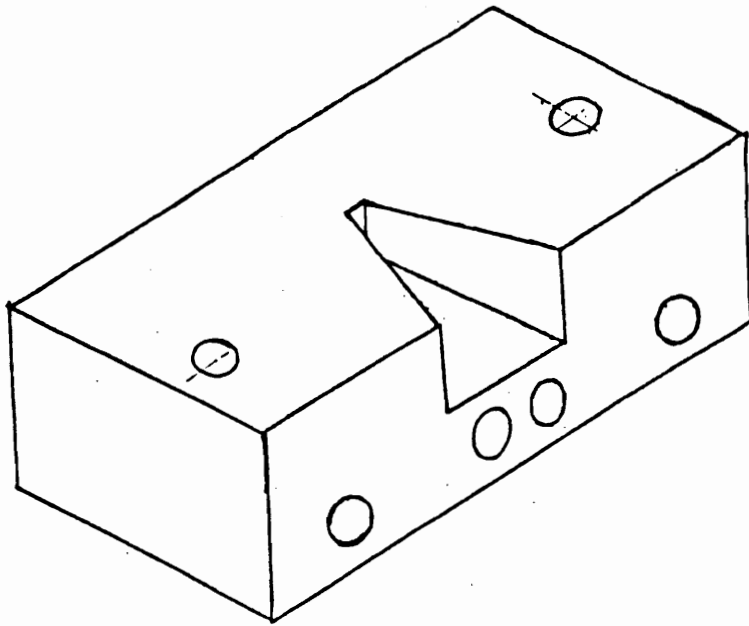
(a): Isometric view of the bottom half of the inlet section (viz. inlet-bottom section).
